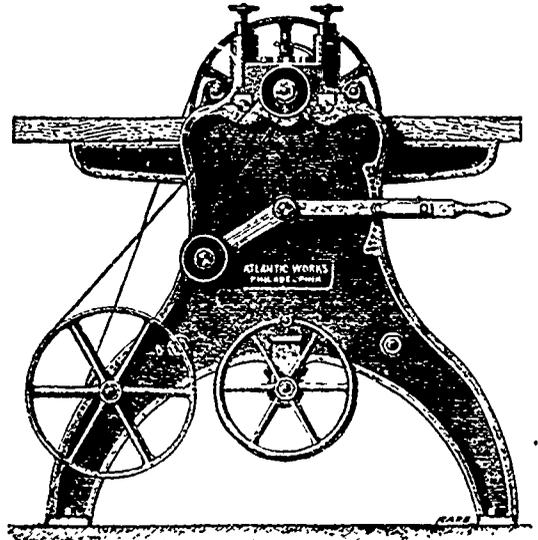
ROLLER-FEEDING PLANING MACHINE
